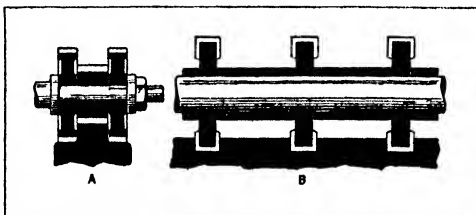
(A) STRADDLE MILL. (B) SET OF THREE MILLS FOR CUTTING GROOVES
